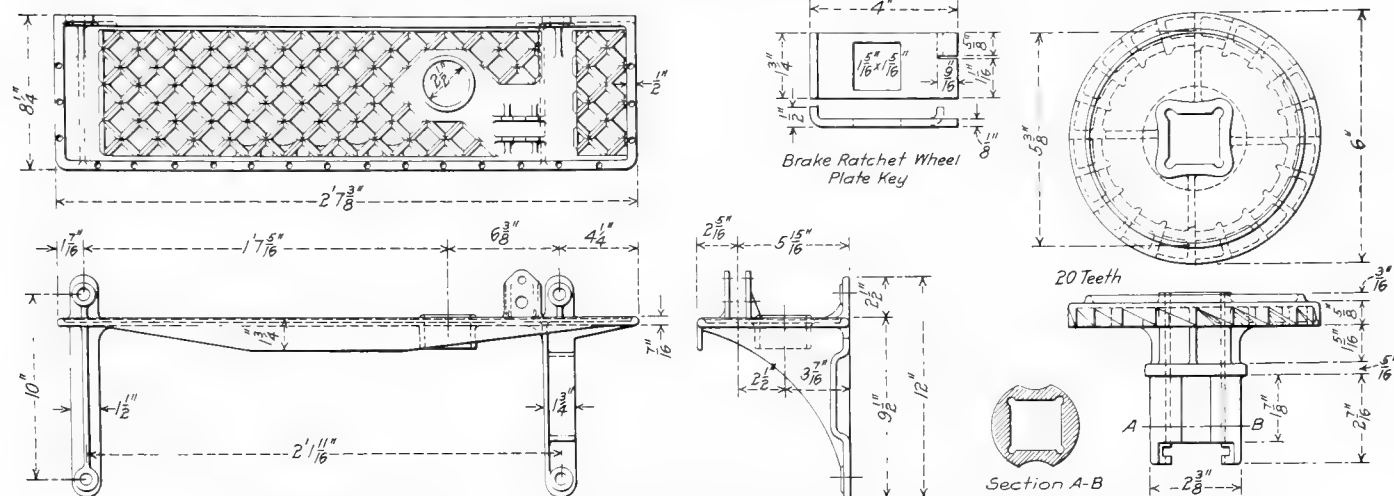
Metal Brake Step and Ratchet Used with Square Brake Shaft, Buffalo, Rochester & Pittsburgh.
